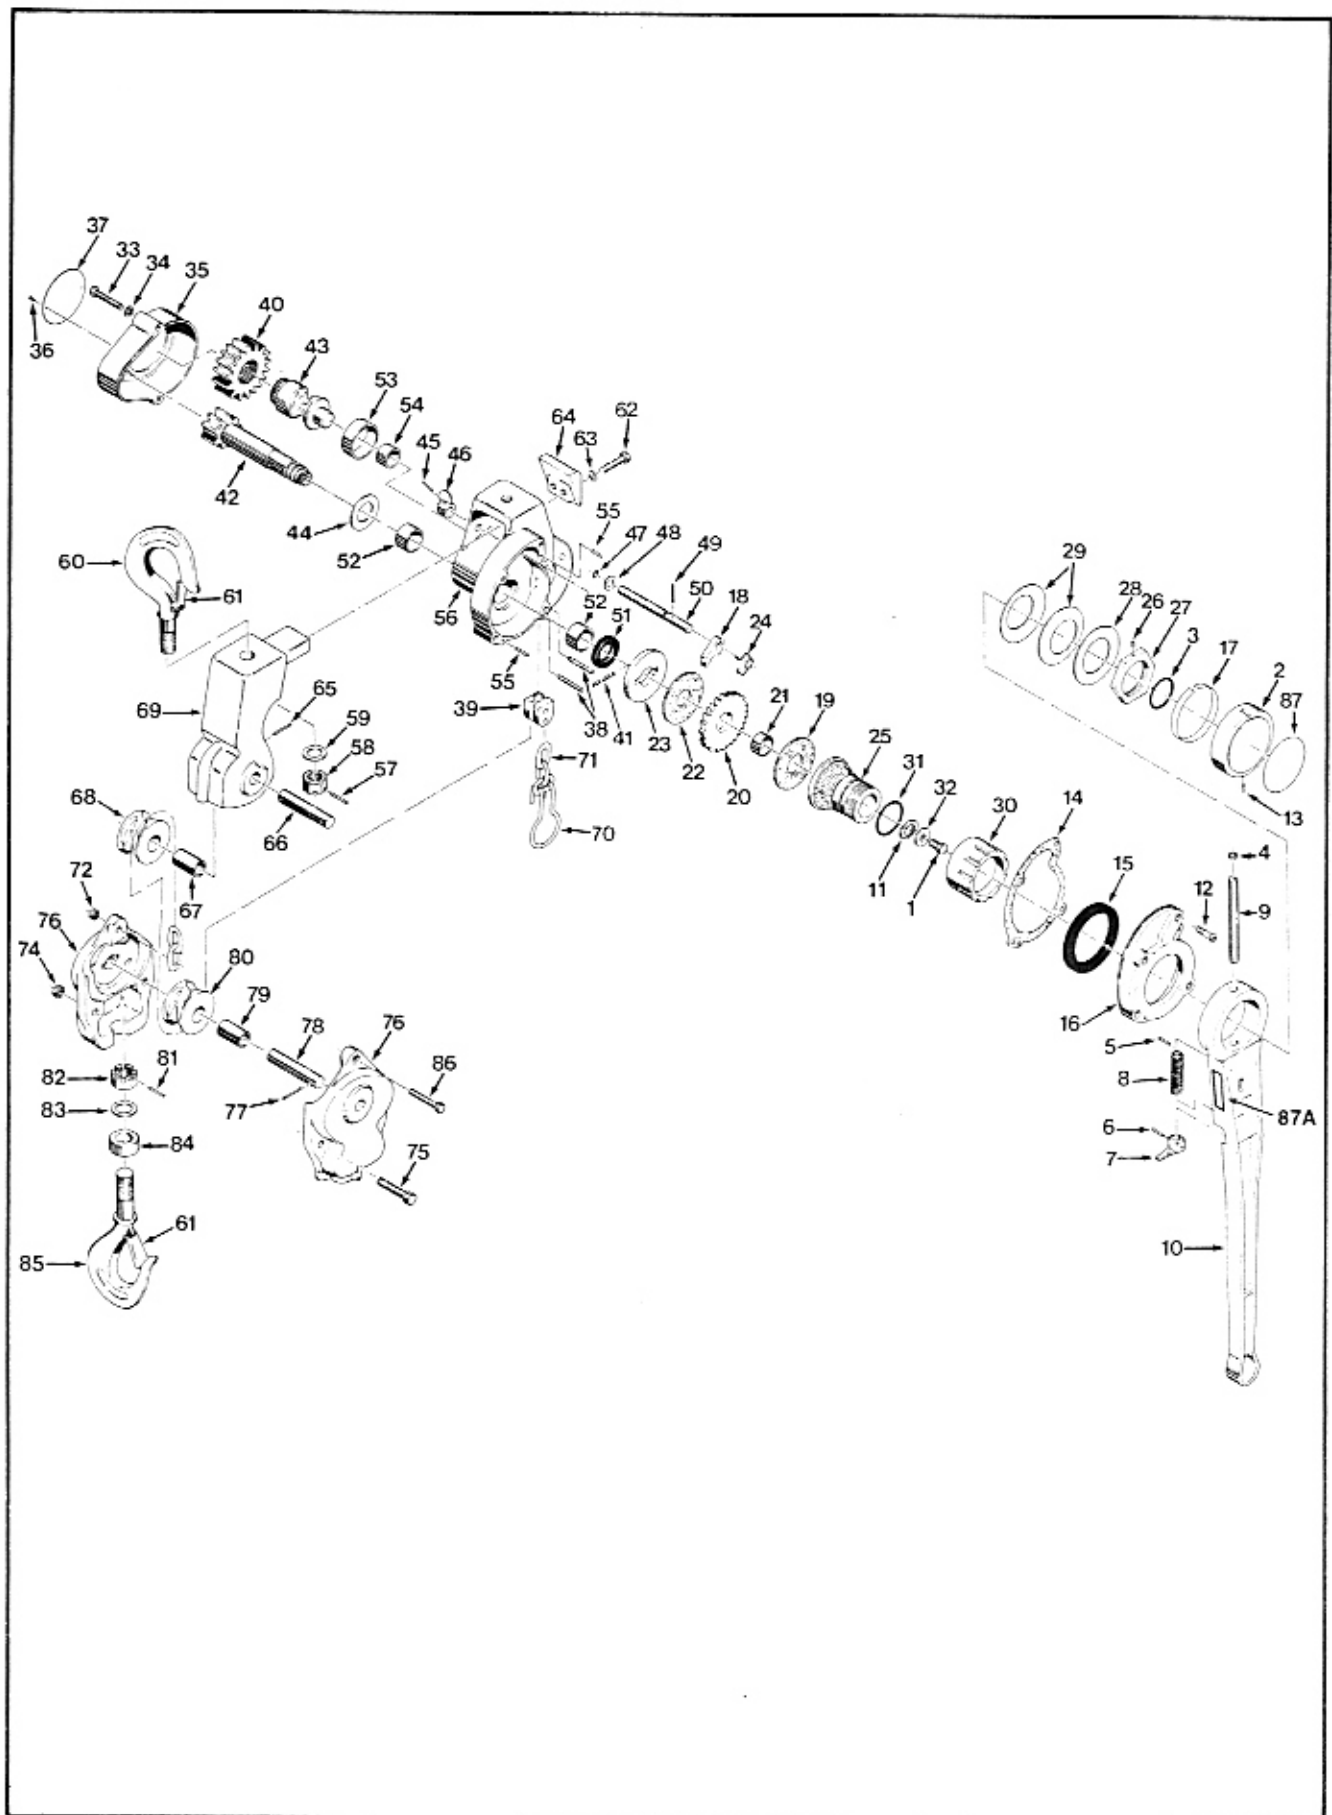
EXPLODED ILLUSTRATION OF MODEL MAL-30-3 HOIST
